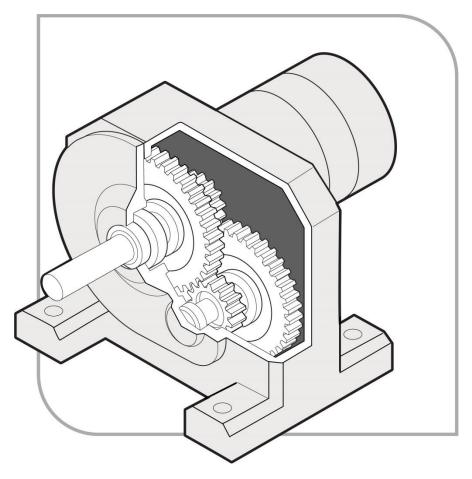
Cut-away view of a fixed physical barrier encasing the gear assembly and electric motor
